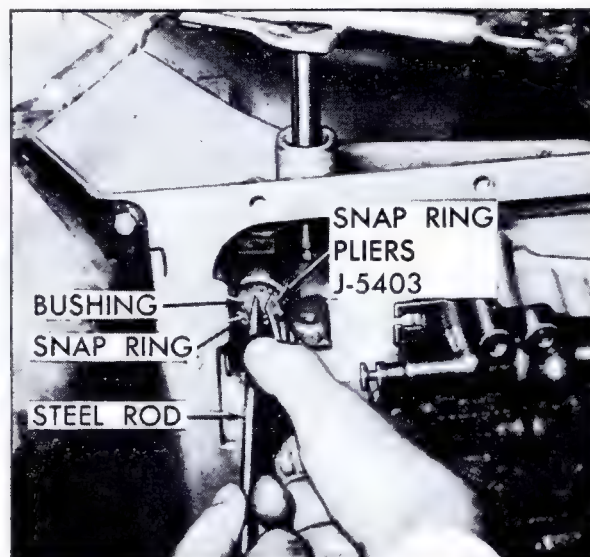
Removing and Installing Pressure Regulator Valve
